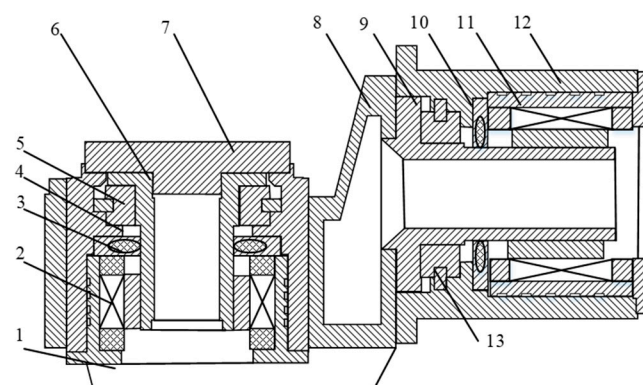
Structure of direct-drive turntable: 1—protective box, 2—C-axis torque motor, 3—pneumatic clamping mechanism, 4—C-axis mounting sleeve, 5—turntable bearing, 6—C-axis rotating spindle, 7—turntable surface, 8—swing frame, 9—A-axis rotating spindle, 10—pneumatic clamping mechanism 2, 11—A-axis torque motor, 12—A-axis mounting sleeve, and 13—turntable bearing 2.
